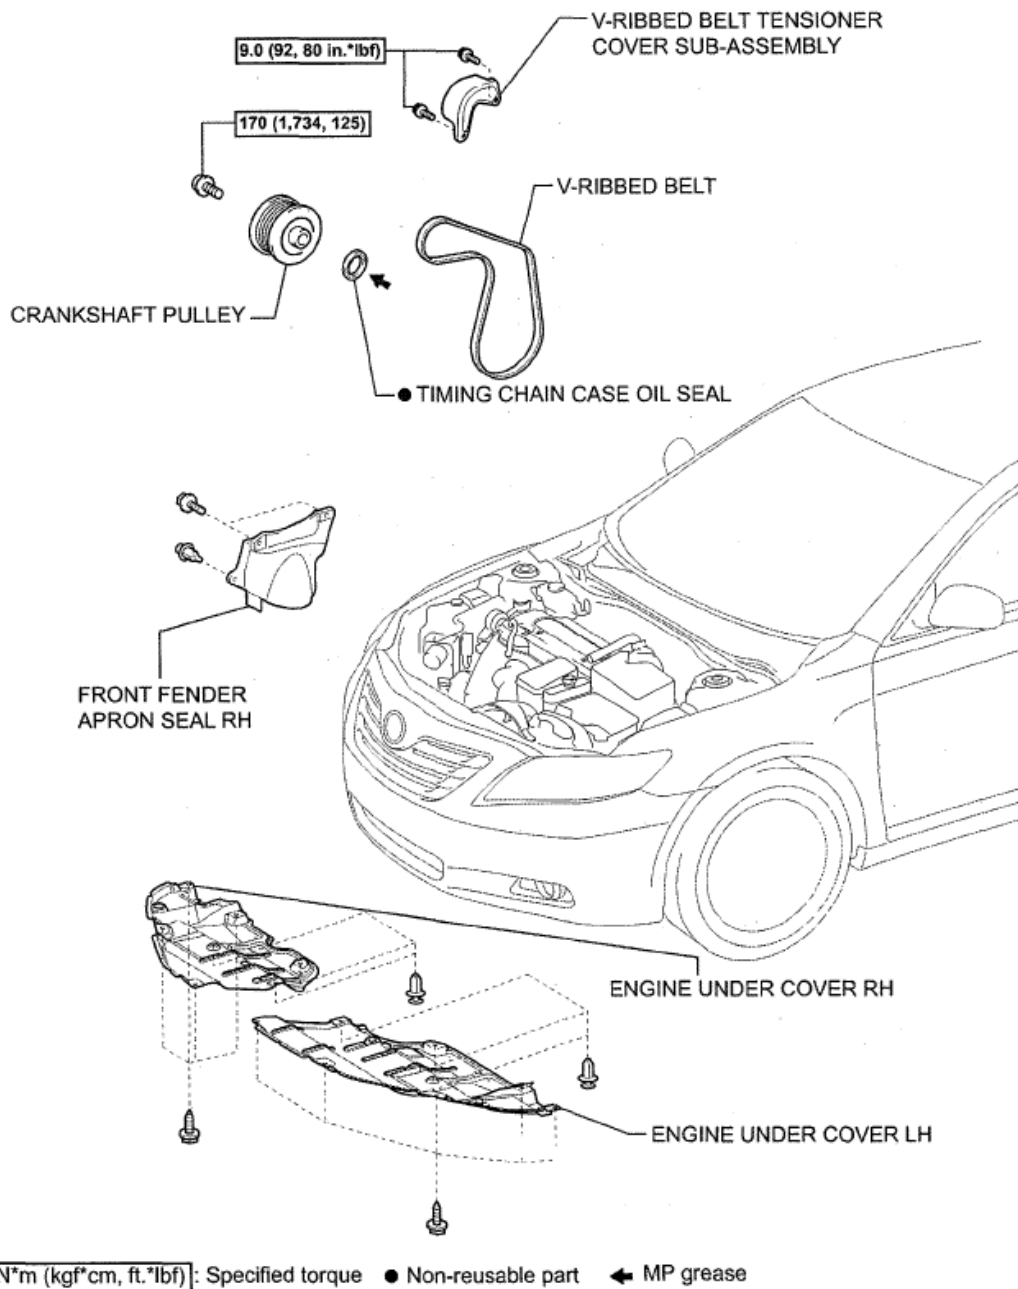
Identifying Engine Front Oil Seal Replacement Components With Torque Specifications
